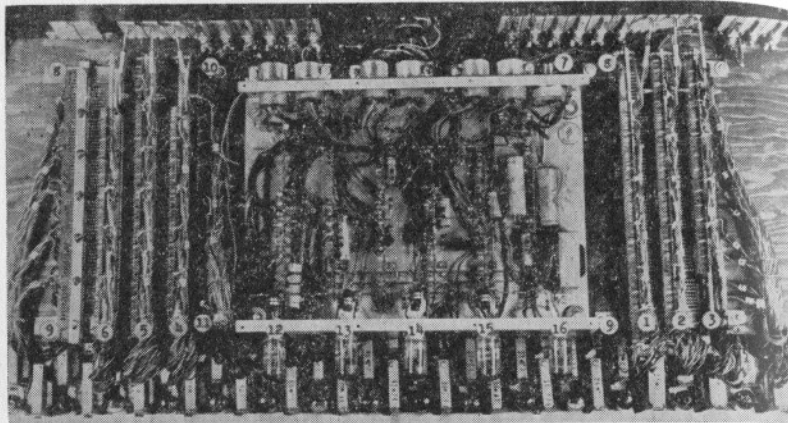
Top View of 2-C Console with Fall Board Removed
